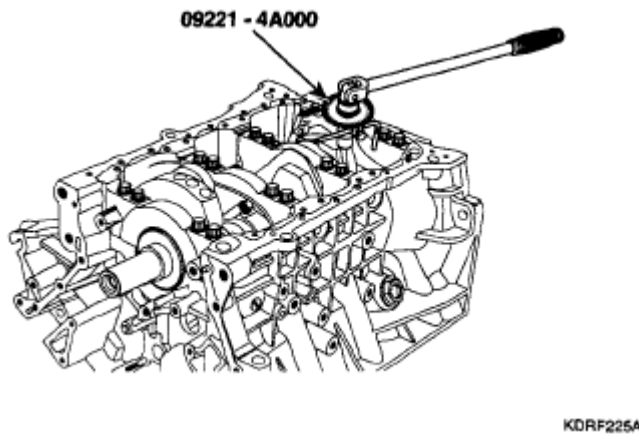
Tightening Connecting Rod Bearing Cap Bolts
